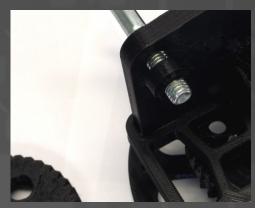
Insert the M8x70 mm bolt in the left side plate (14) and add the short M8 spacer (32).
